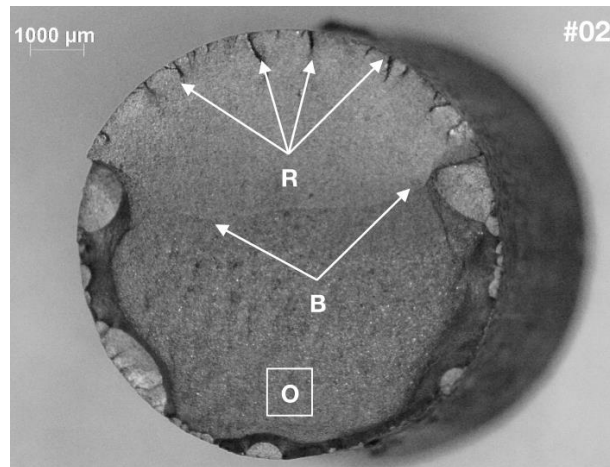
Specimen #02 (diameter 8 mm, applied load 1000 MPa), fractographic image. O = final failure zone; B = beach marks; R = ratchet marks.
